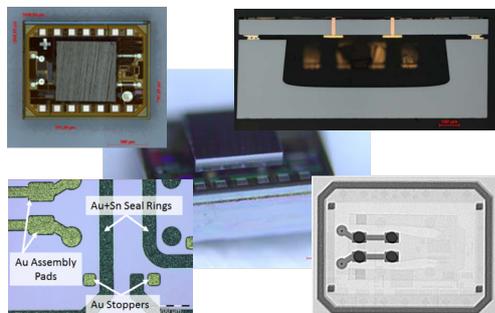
Timing module photographs: center, side view showing wafer stack and BAW die on top of CMOS; top-left, top view showing IC IOs, RDL and TSVs; top right, cross section revealing TSV, XTAL, and cap; bottom-left, CMOS backside, bottom right, X-ray picture.
